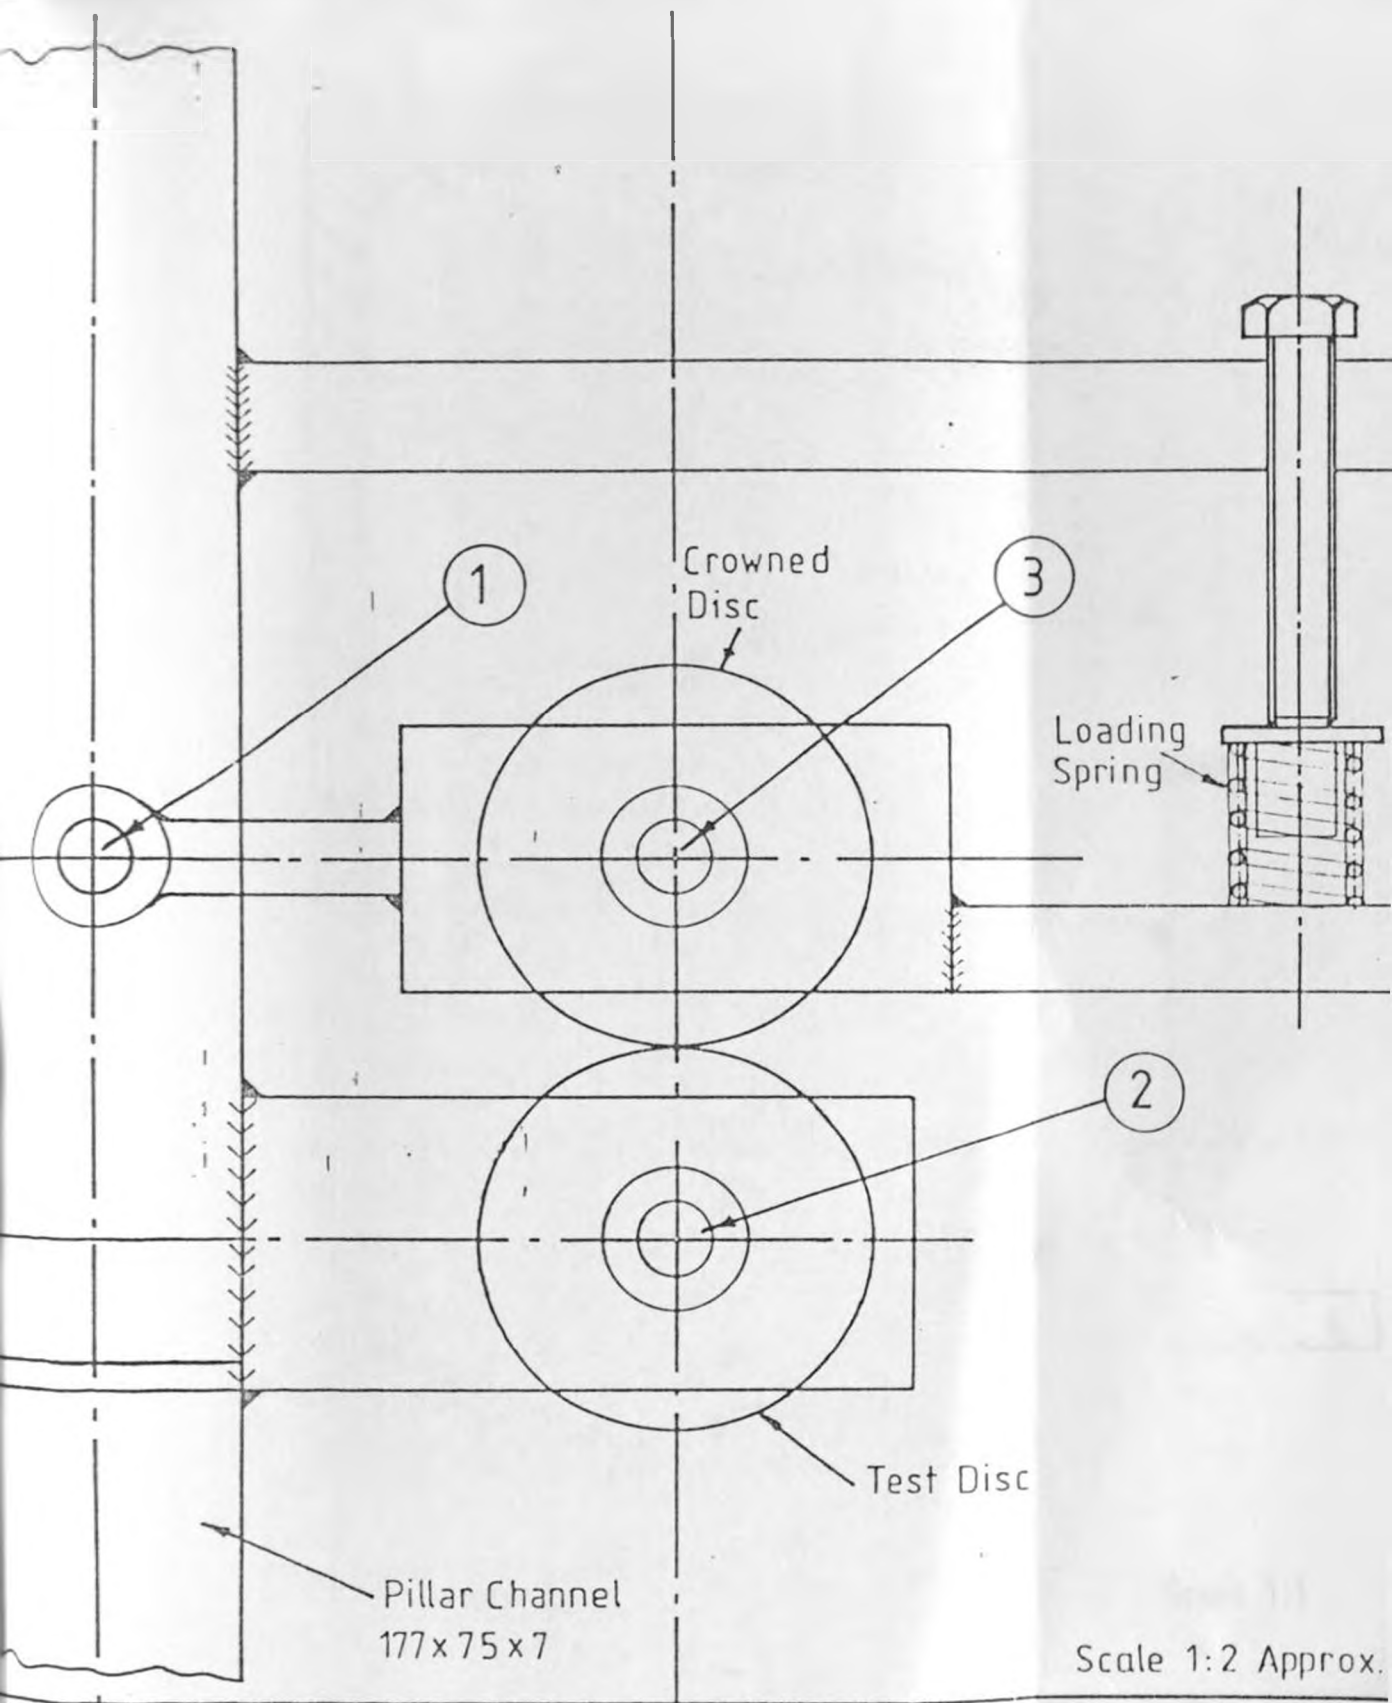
Front View of the Rolling Rig Showing the Main Assemblies 1, 2 and 3. detailed in Fig. 3.5 to 3.7.
